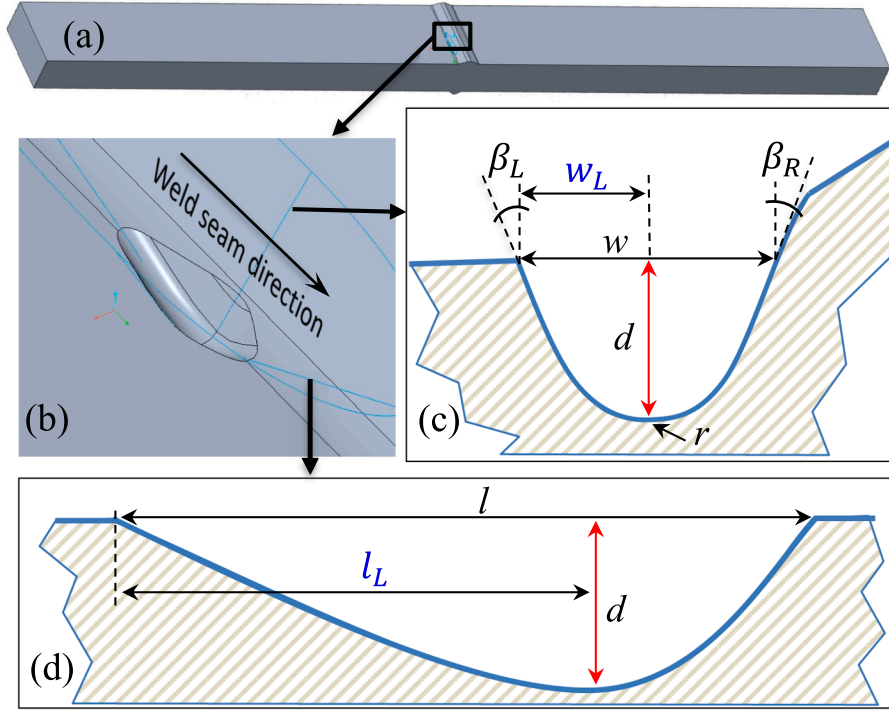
Schematic diagram of 2D control curves for the undercut geometry. (a) specimen showing weld seam direction and location of undercut, (b) undercut location at the weld toe, (c) 2D control curve perpendicular to weld, and (d) parallel to the weld.
